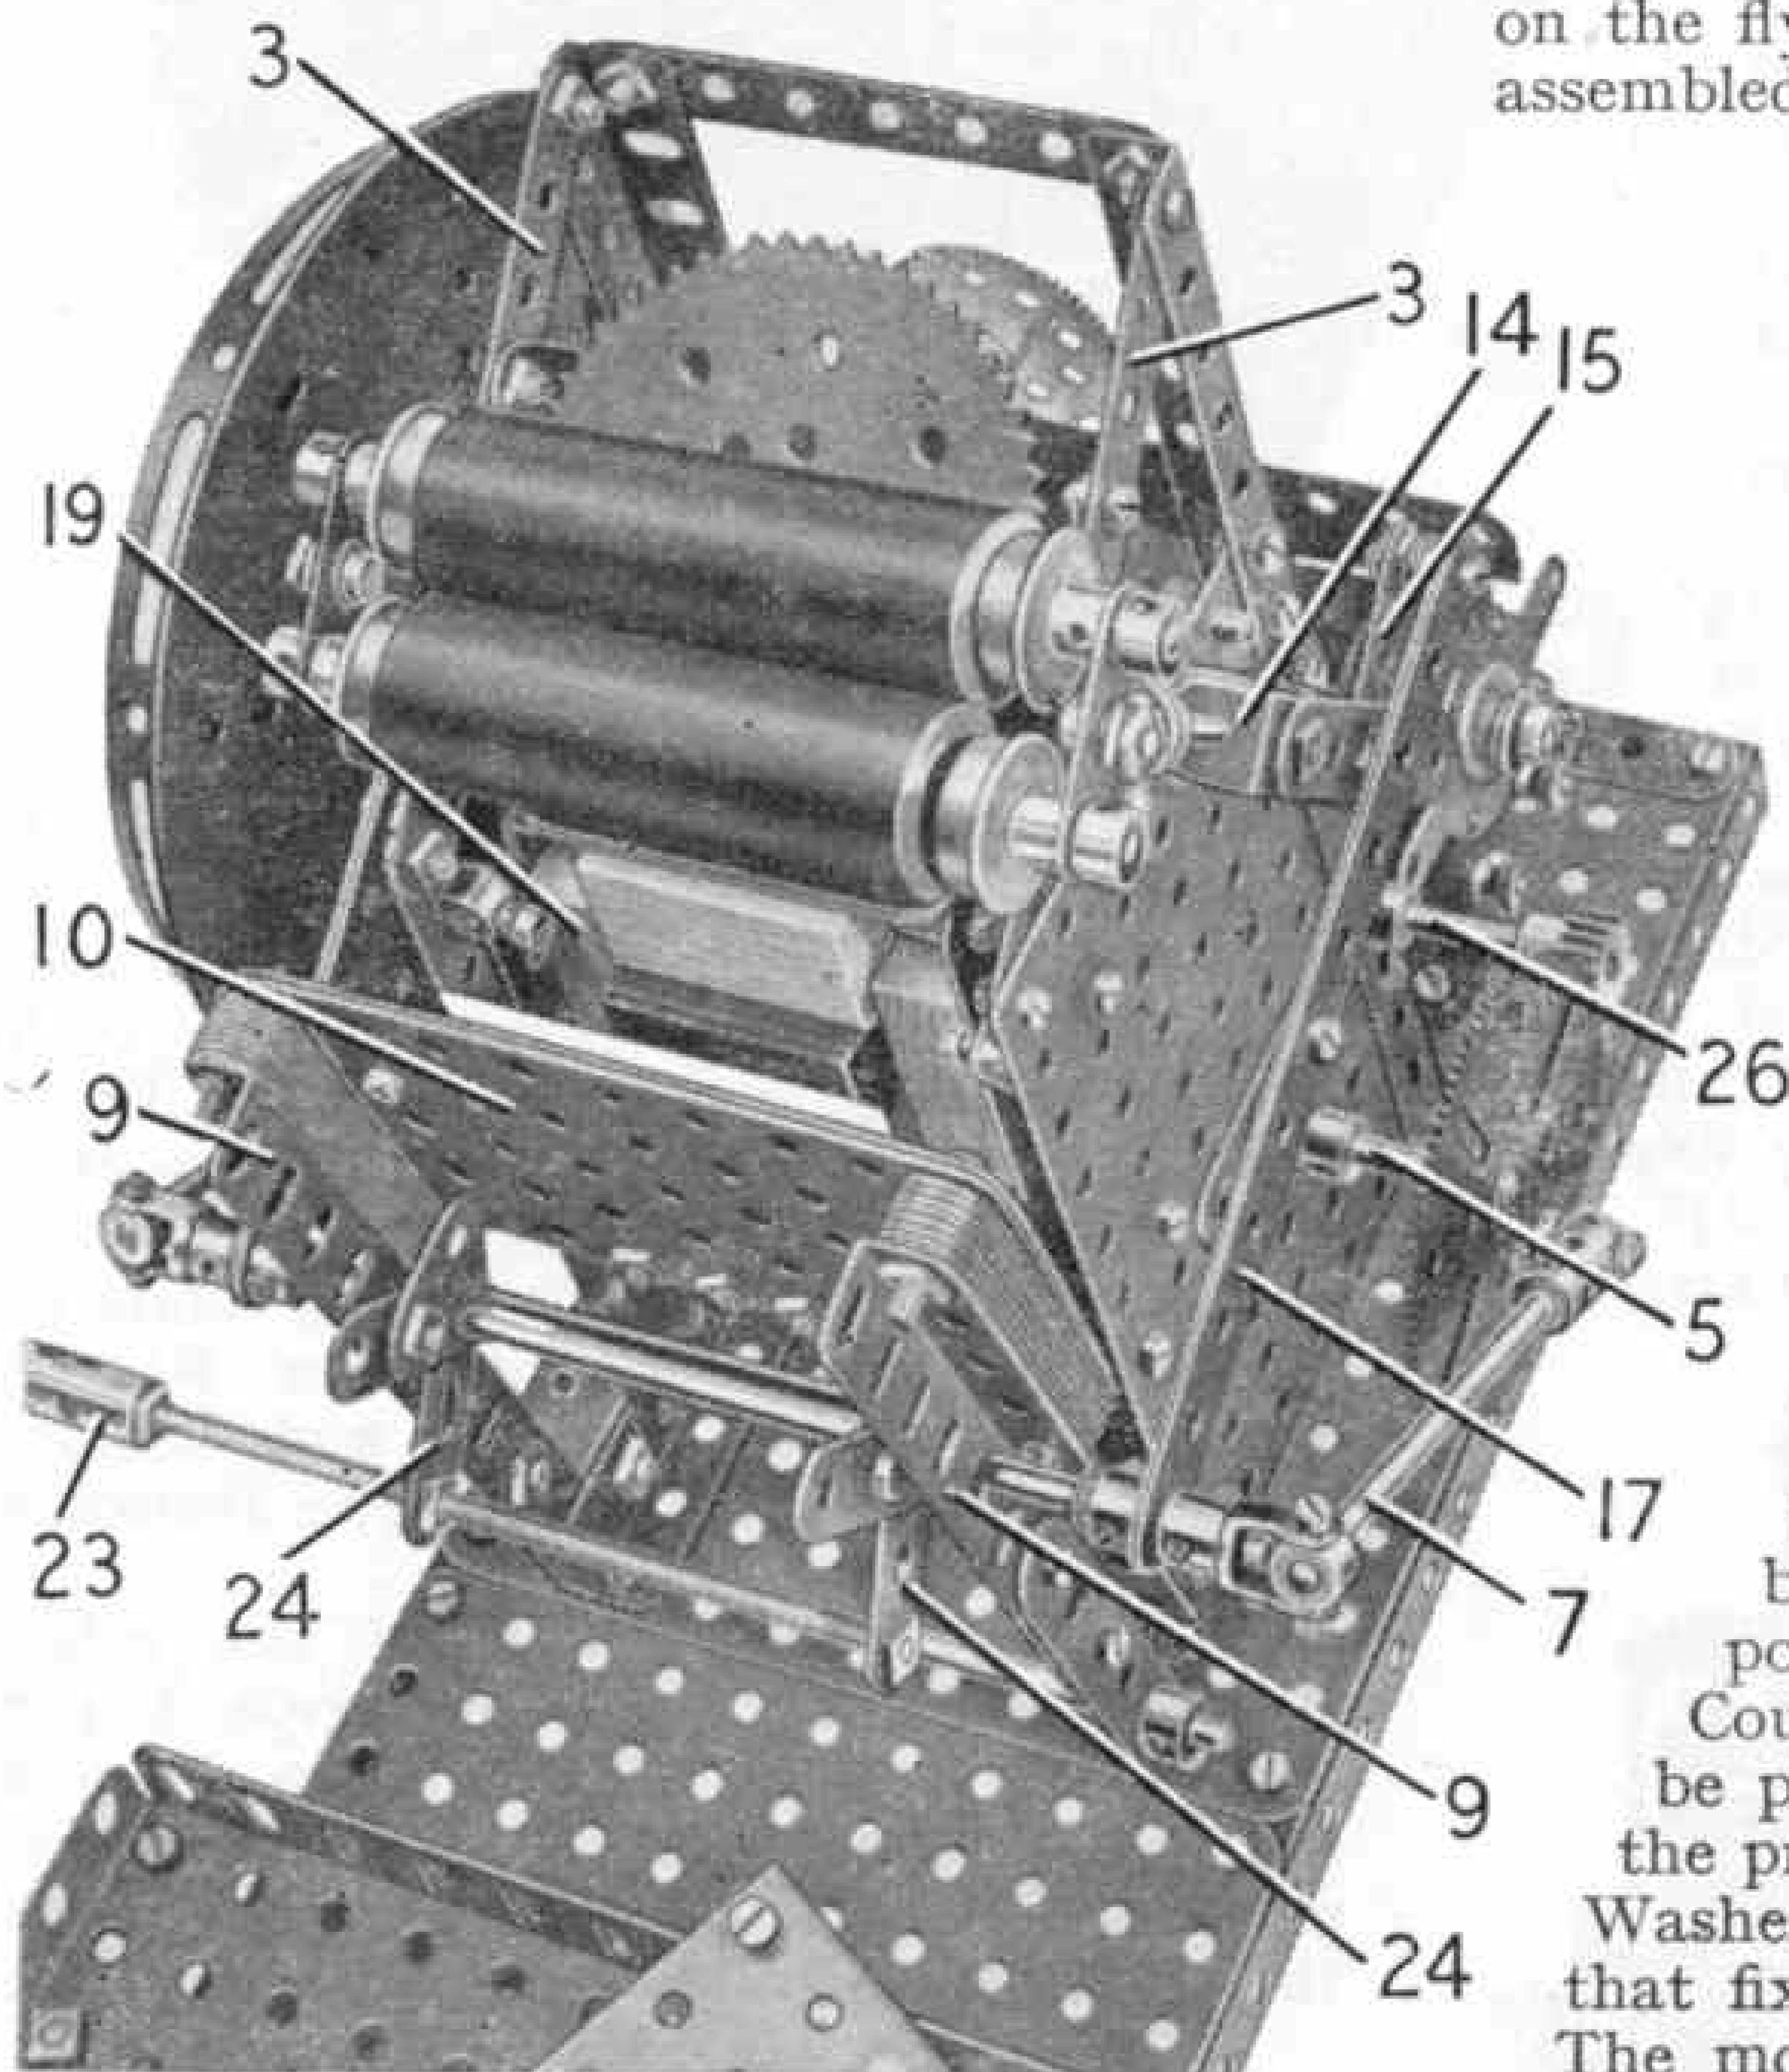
A close-up of the inking rollers and the crank mechanism that operates the machine.
